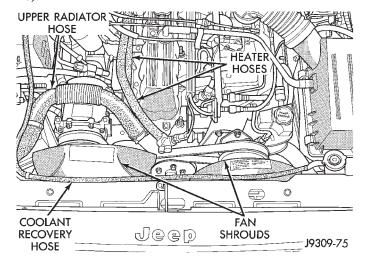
Upper Radiator Hose, Coolant Recovery Hose, Fan Shroud & Heater hoses
